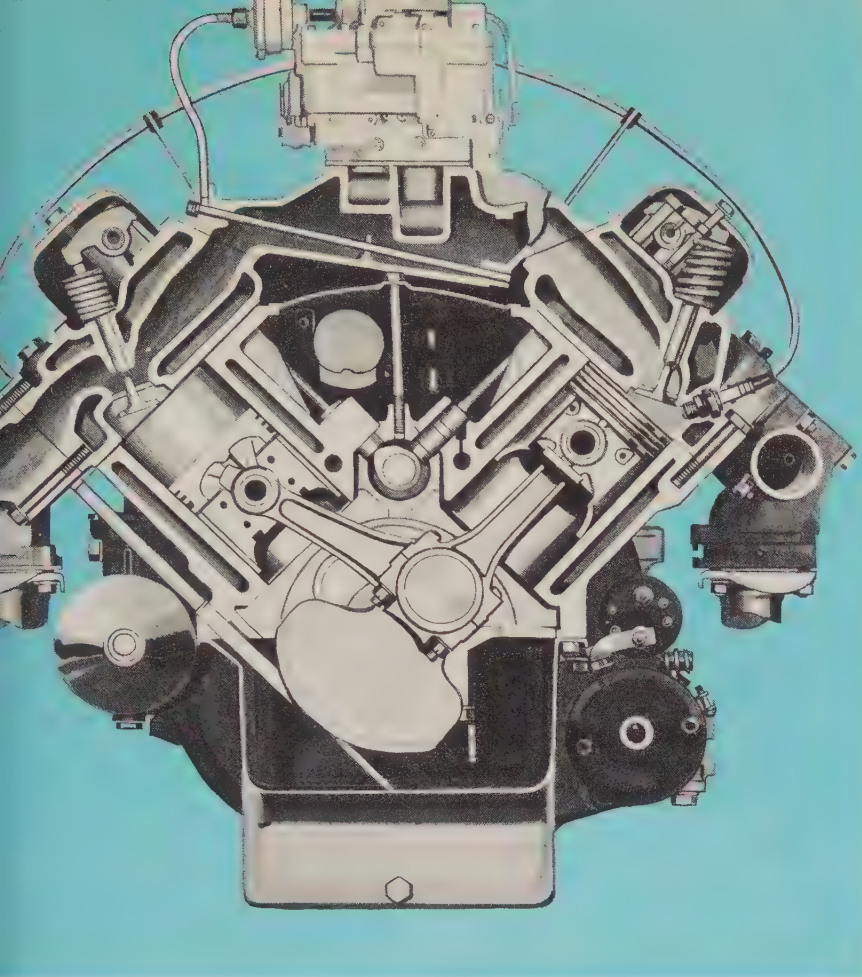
Transverse section of a V-8 engine which uses a total of 16 hydraulic valve lifters. As shown on the right cylinder bank, the lifter rides on the cam and is guided in a hole bored in the block of the engine and is connected to the rocker arm by a push rod. On the other side of the rocker arm are the valve, valve spring, valve-spring retainer, and keepers.
